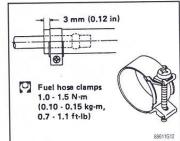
When installing fuel hose clamps, be sure to position the clamp so it is 3mm from the end of the hose
